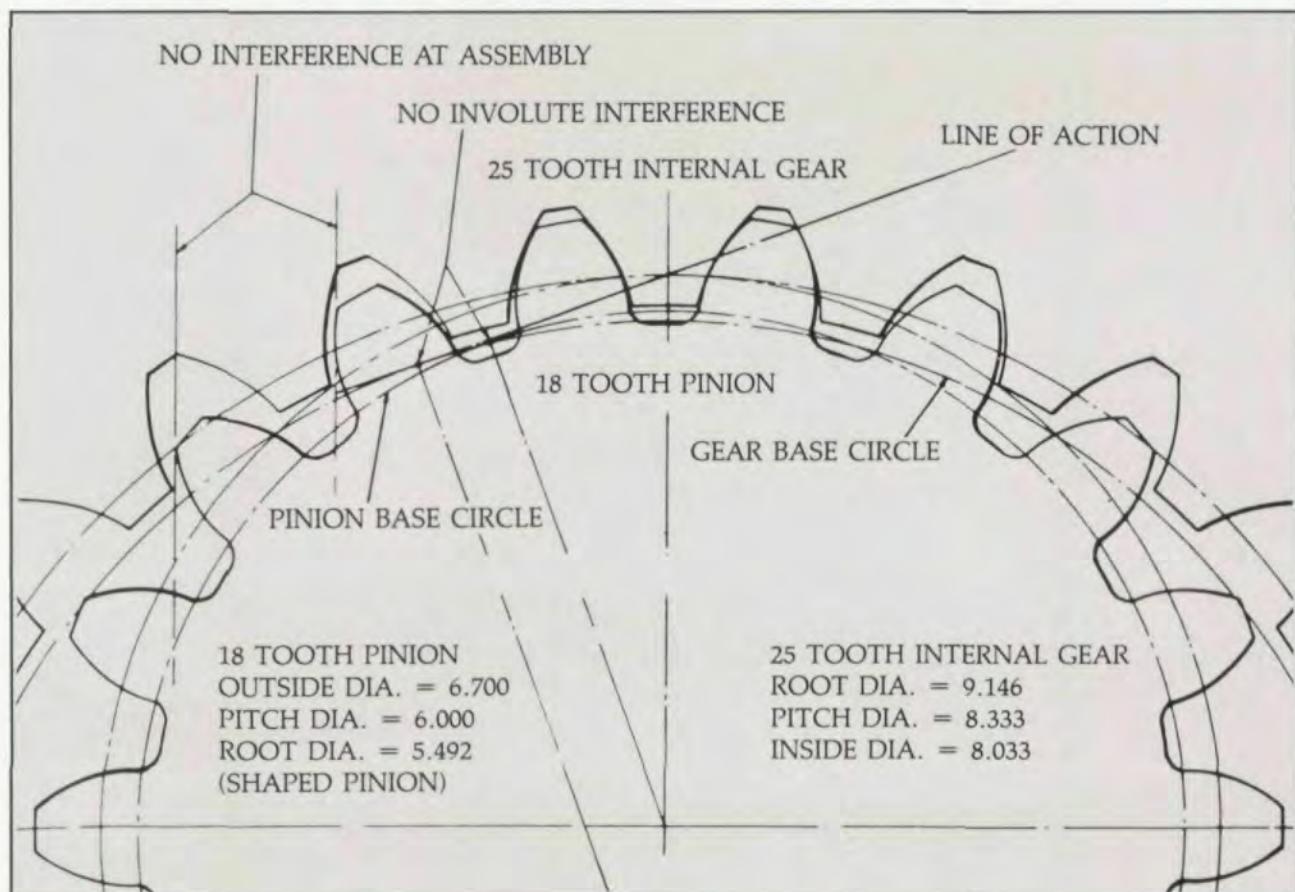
DP- 20° Stub Tooth Form — Recommended Design
